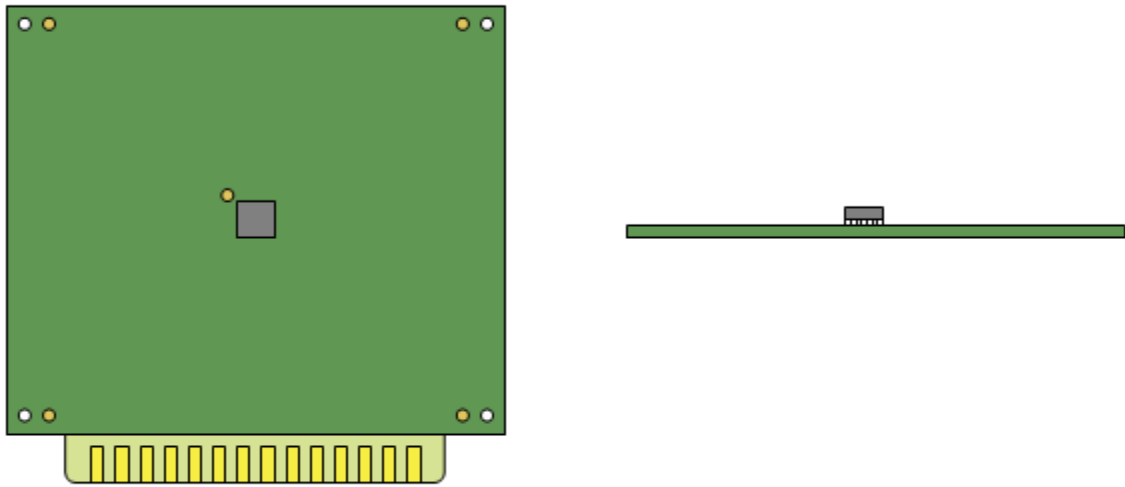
Configuration of a Single-component Edge-type Adapter Test Board
